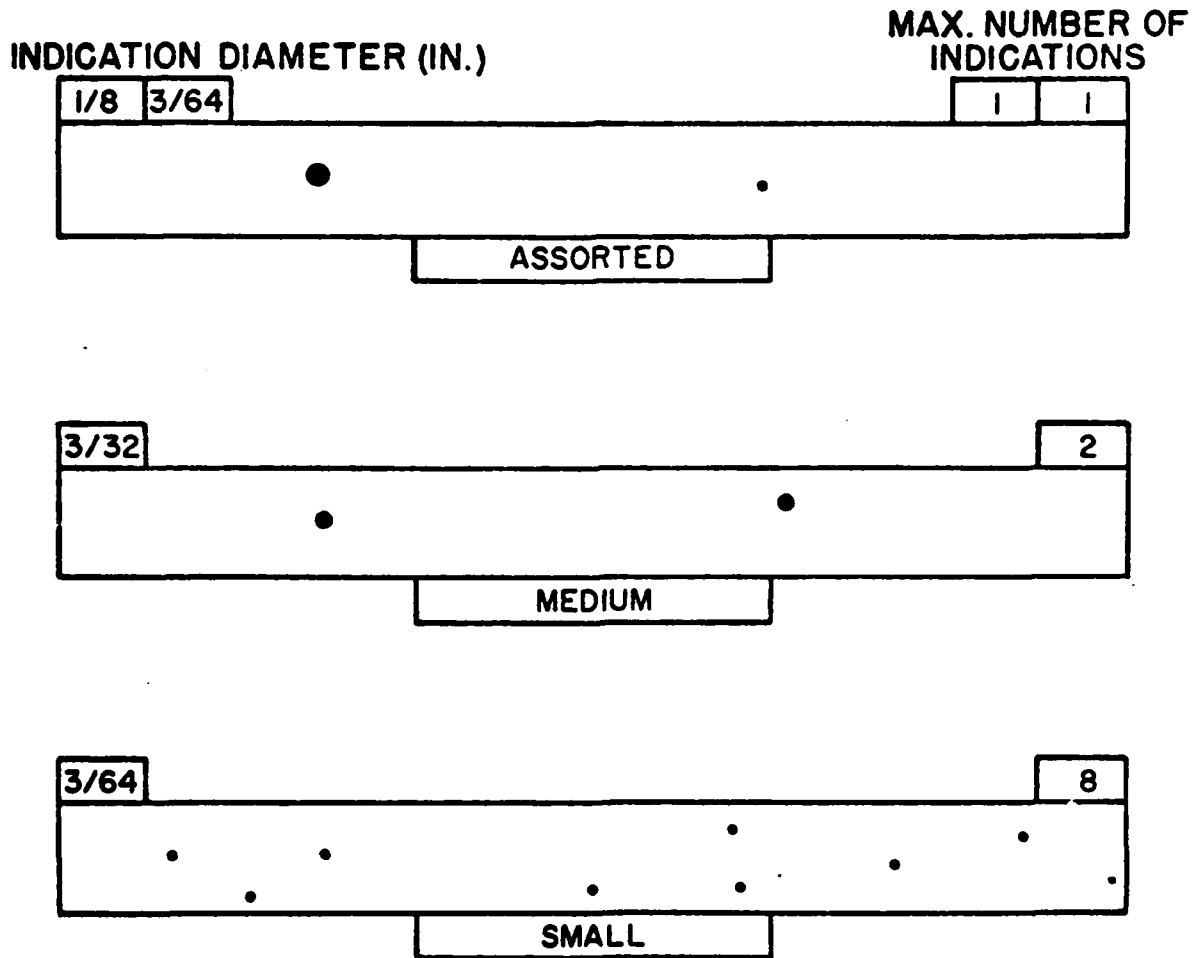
Class 1 Weld Surface Inspection Standard for Scattered Rounded or Non-Linear Indications (Sheet 4 of 6).
